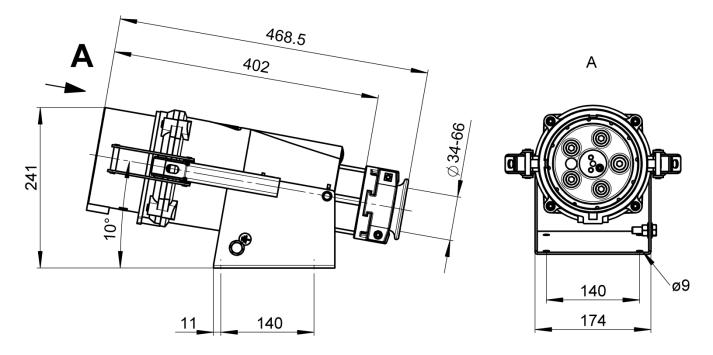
Dimensions Male Connector Wall MCW B-Line (250 A – 400 A) in mm
